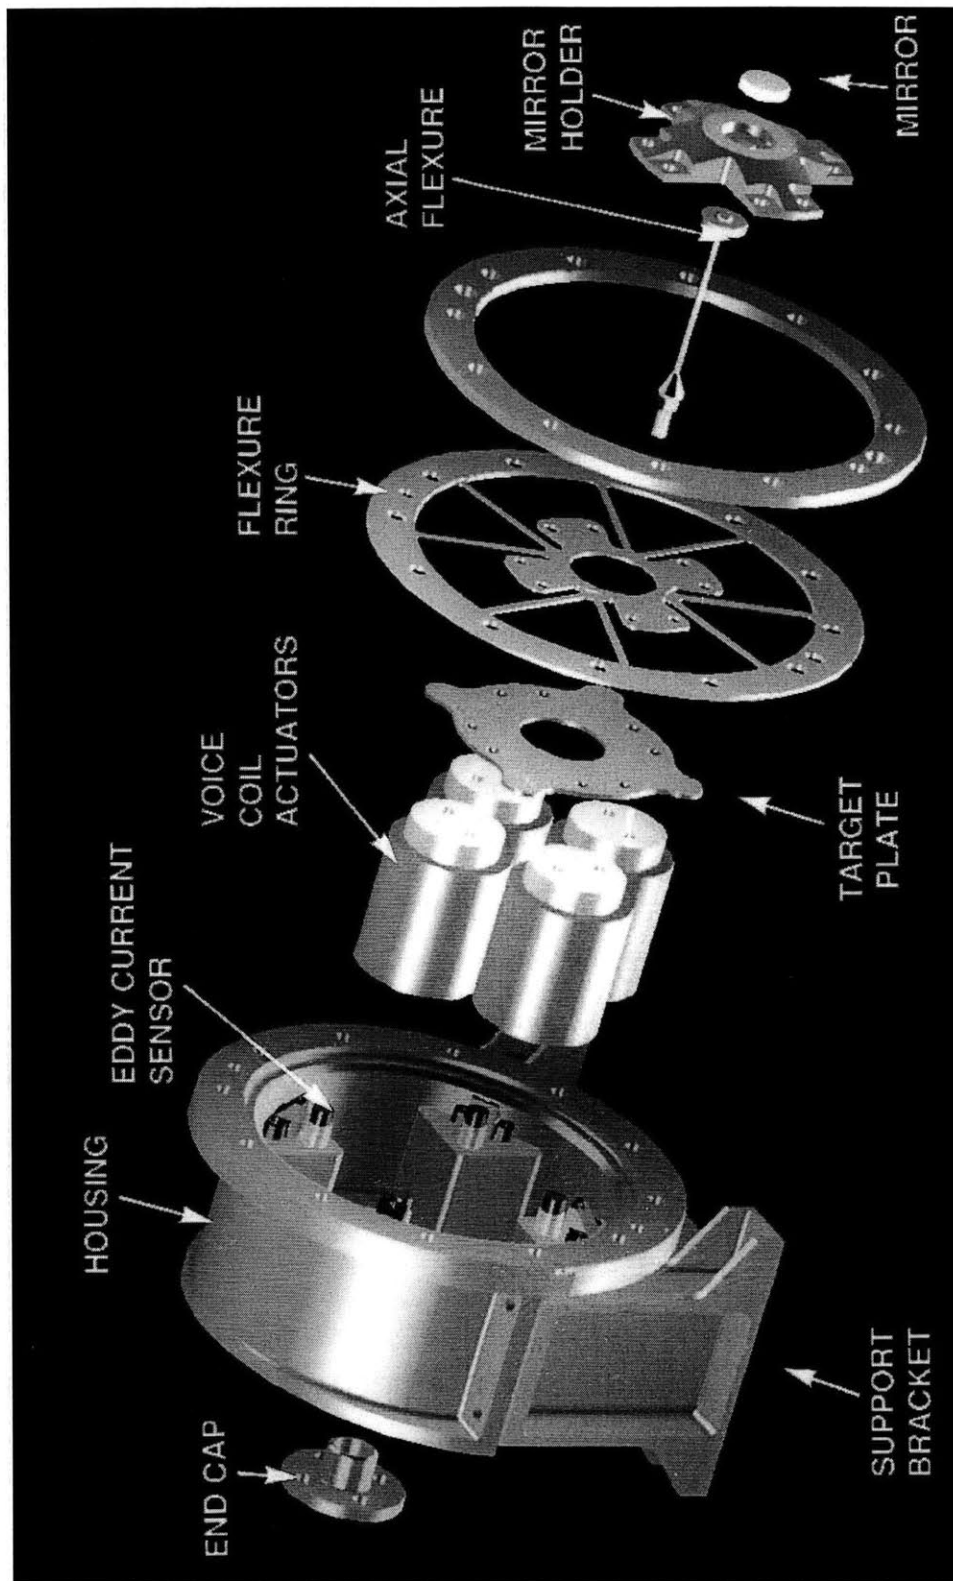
Exploded component diagram of the FSM (shown with a smaller mirror), courtesy of James Roberge.
